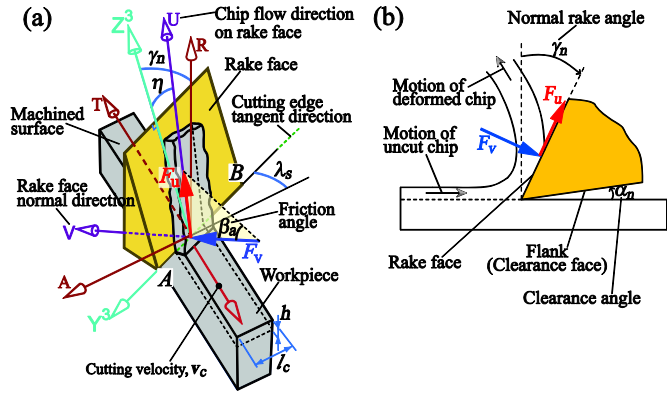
Schematics of chip removal at differential cutting edge element. (a) Oblique cutting with rake face forces shown. (b) Orthogonal cutting in cutting edge normal plane view
